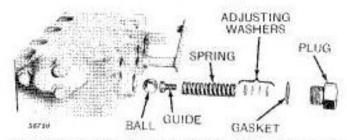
Location of Adjusting Washers in Single Remote Cylinder Valve Housing Relief Valve
